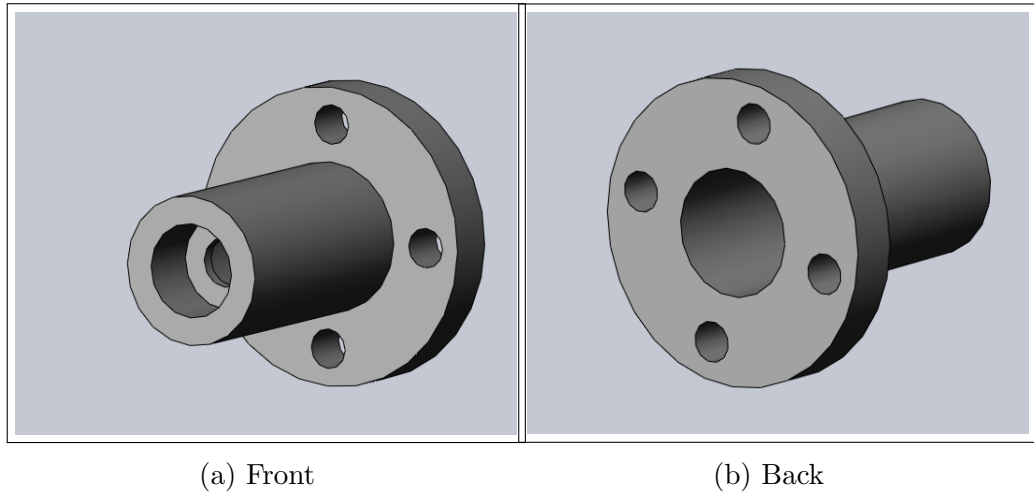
Solidworks rendering of grease filled shaft seal mount
